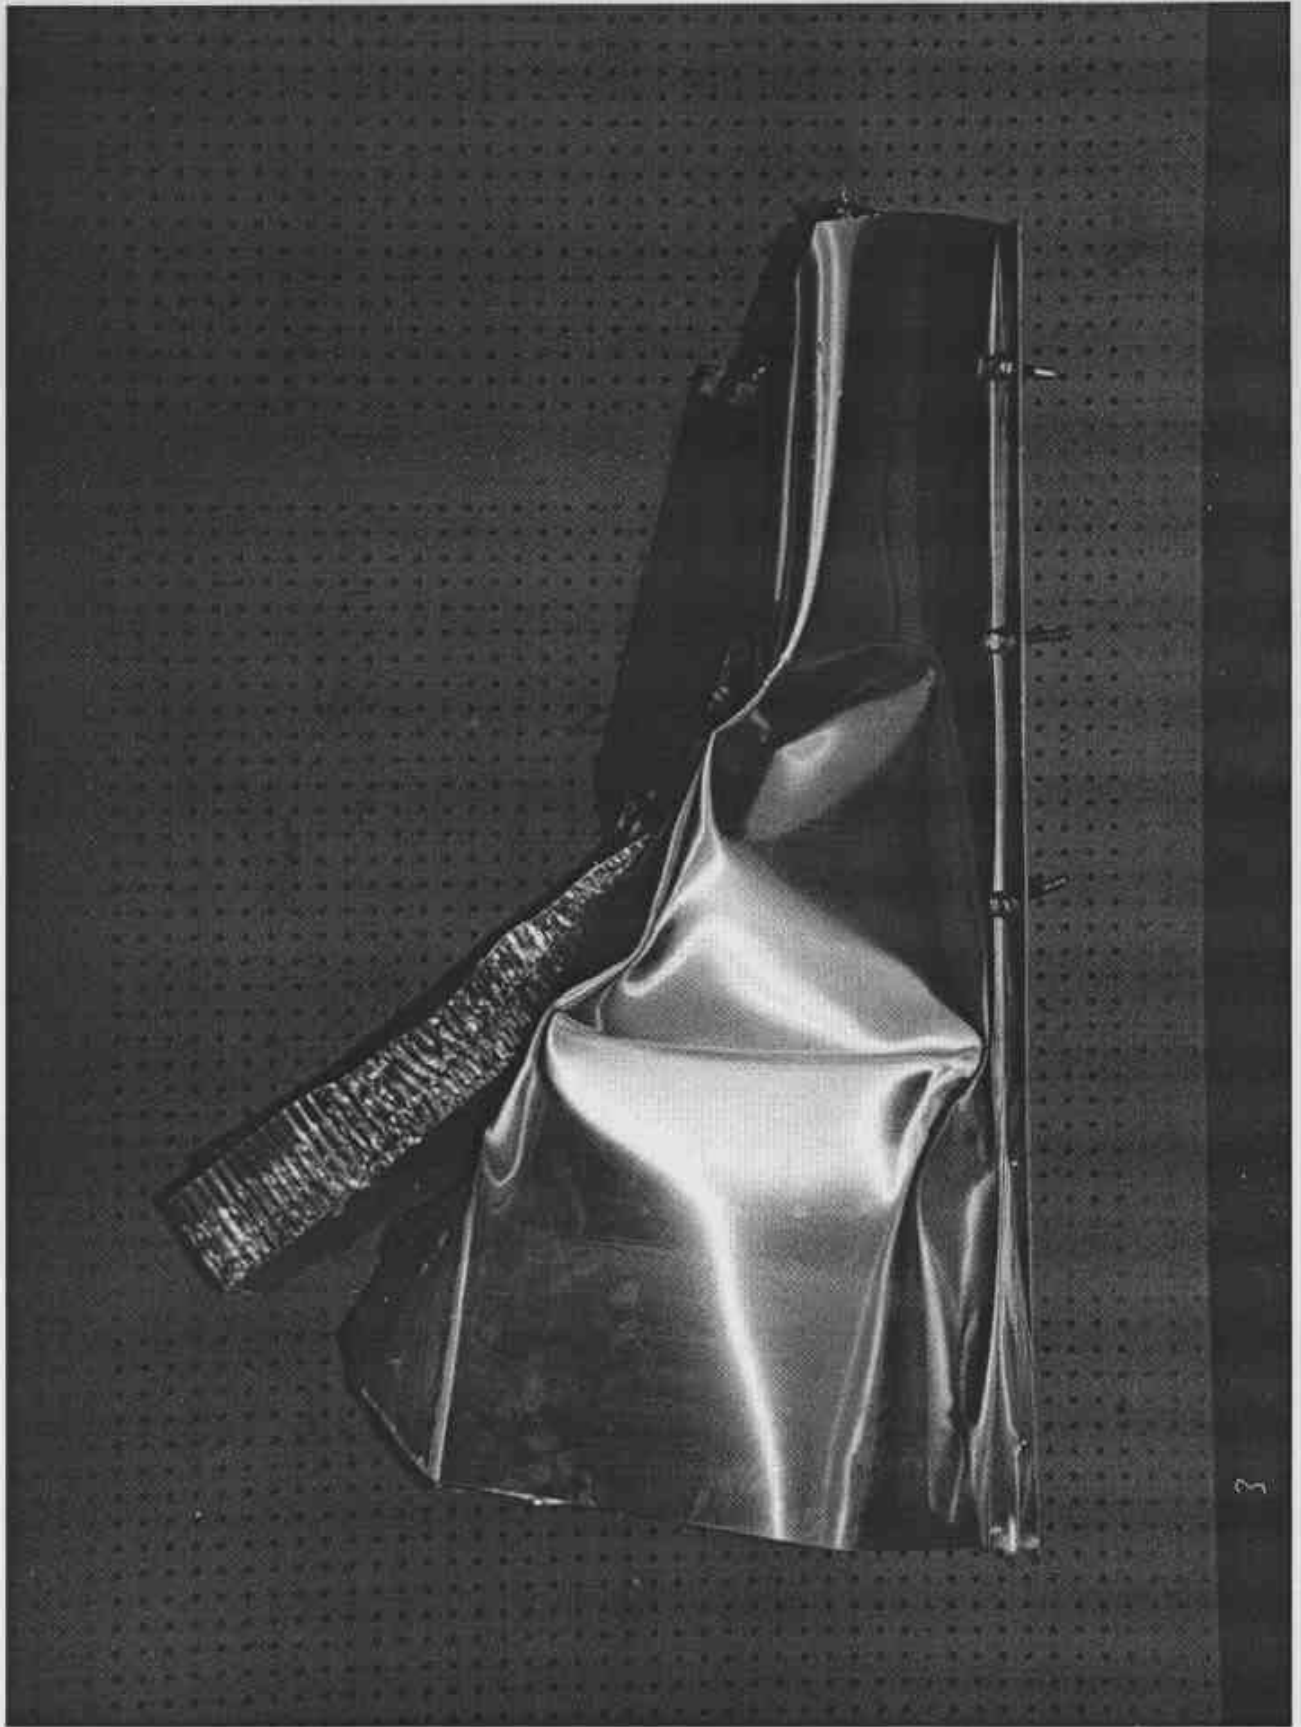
POST TEST BARRIER BOTTOM VIEW
